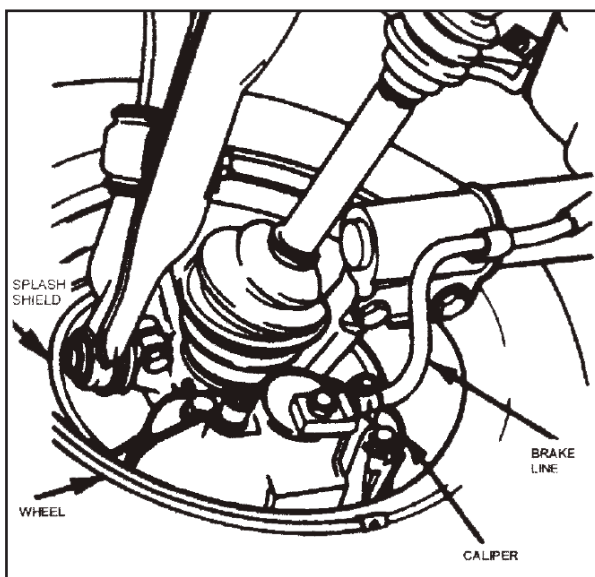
Illustrates a typical disc brake assembly for a front wheel drive vehicle.
